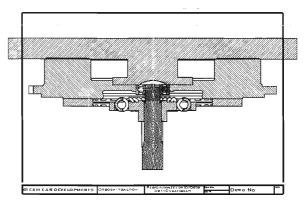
Pefo Flywheel on ID/DS19 or 11D Crankshaft
